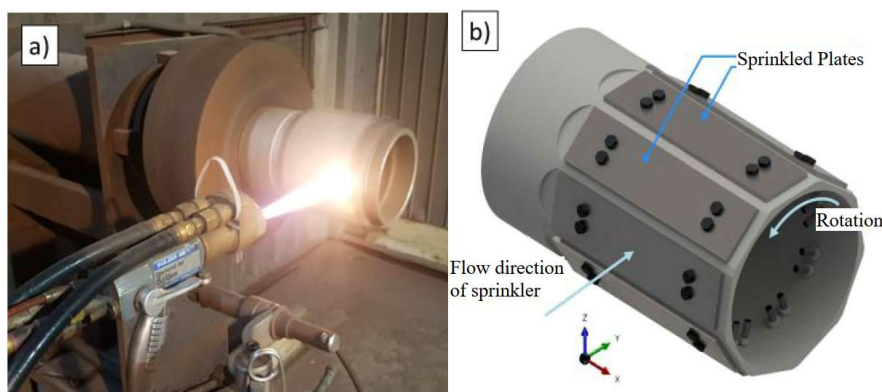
HVOF equipment used in the sprinkler process; (a) Diamond Jet DJ2700; (b) Specimen clamping device.
